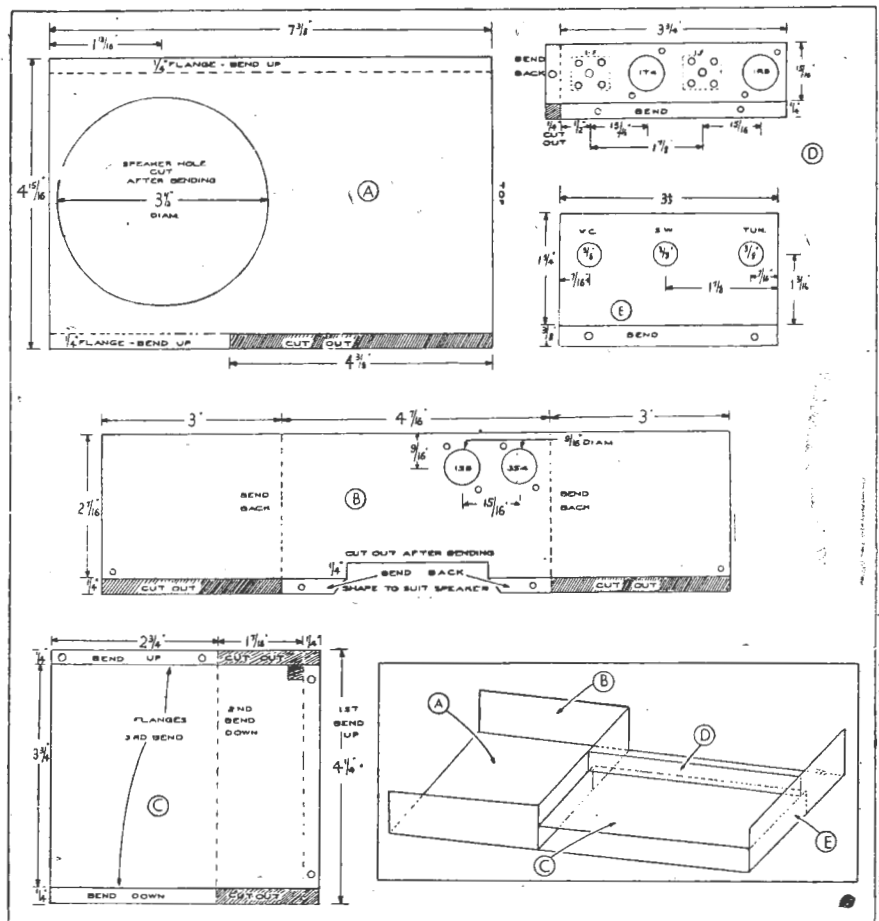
Here are the complete chassis details for those who may wish to make their own chassis.
